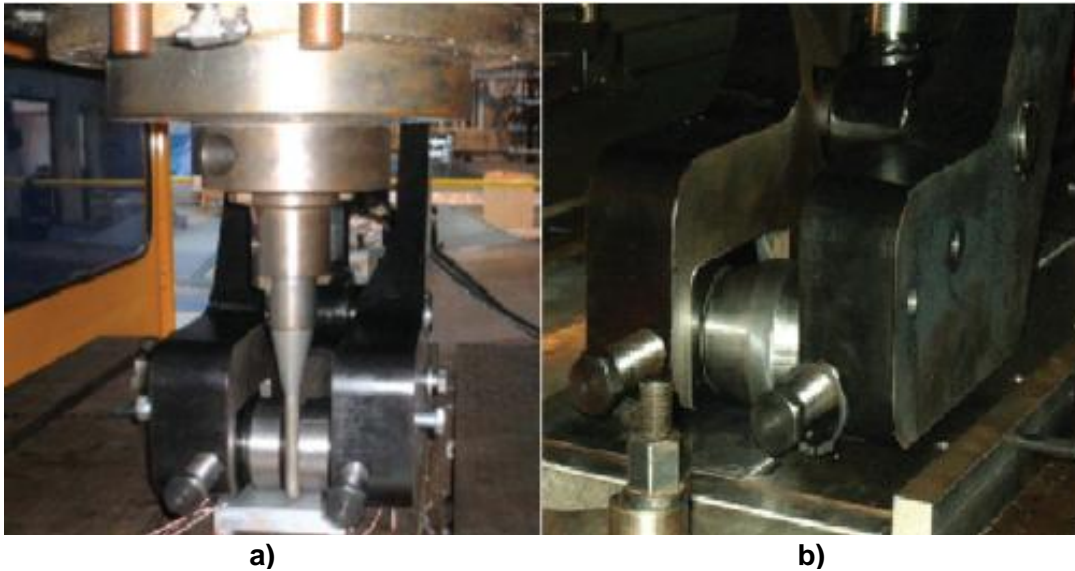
Local Mechanical Tensioning equipment with a) ISRT and b) PWRT rollers arrangement [21]
